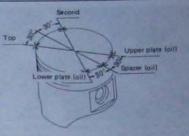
Piston ring end gap spacing (Sec 43)
